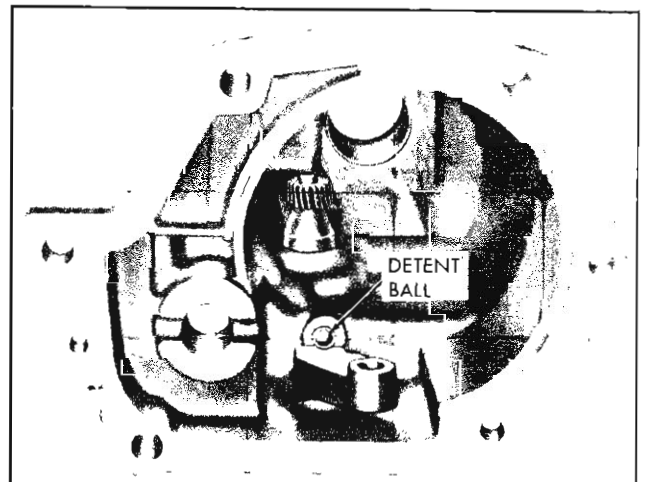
M—Installing Reverse Shifter Shaft and Detent Ball
